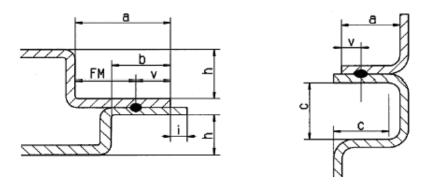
Functional distances from a spot weld to the border of a flange or depression. (VW 01105-1)
